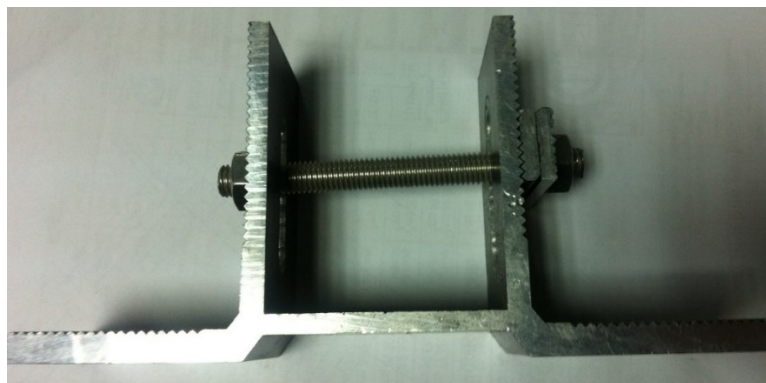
Photograph of the fabricated shoe bracket assembly with threaded rod and side fixing plates
